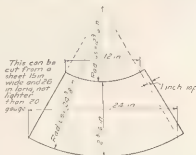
Diagram for cutting metal to make the frustum of a cone used for the slump test
